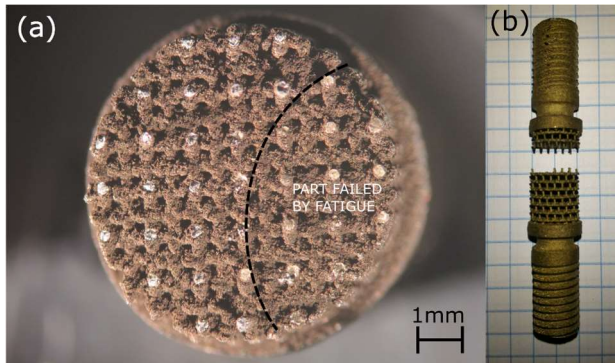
(a) Fractured section of a fatigue testes specimen (as built CUB S). The struts failed by fatigue (in the area indicated as “part failed by fatigue”) are golden because of the heat tinting. (b) Fractured specimen after a fatigue test. The fracture is away from the bulk/cellular interface.
